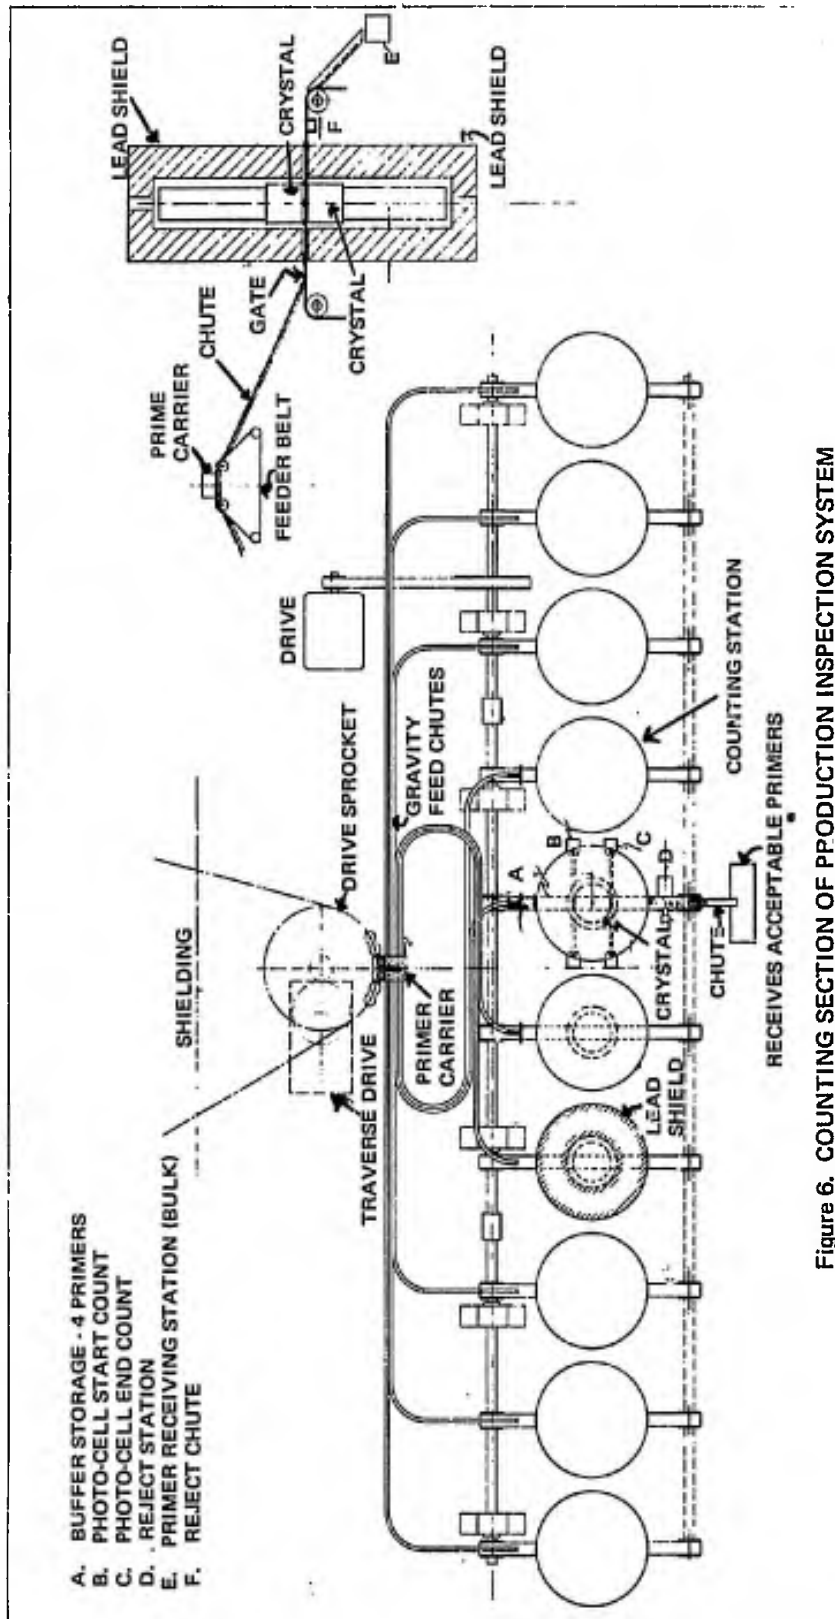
COUNTING SECTION OF PRODUCTION INSPECTION SYSTEM
